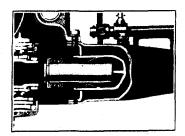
Tool 89263 In Use on Ball Bearing Type Axle.
